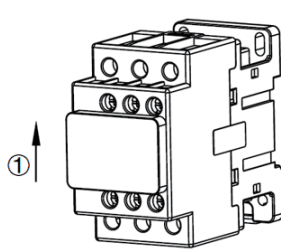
Installation method of F3 top-hung aux., FY3 air delay head
